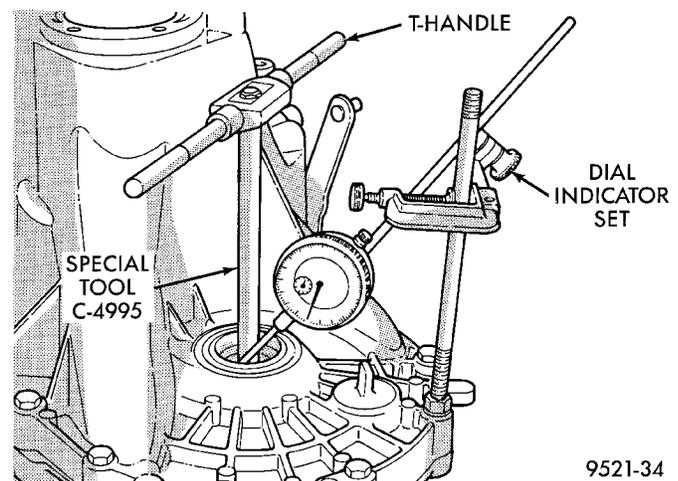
Checking Differential Bearing End Play To Determine Shim Thickness
